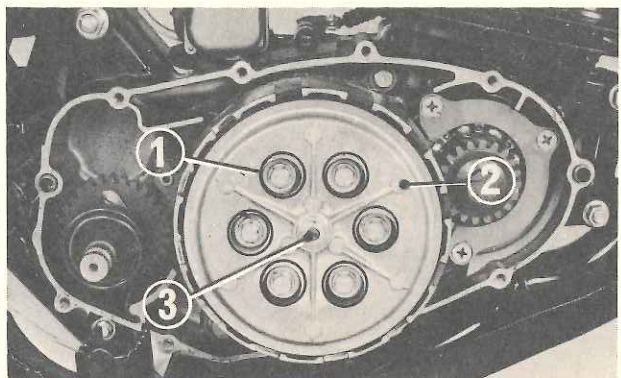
(1) 6 mm bolts (2) Clutch pressure plate (3) Clutch lifter rod
